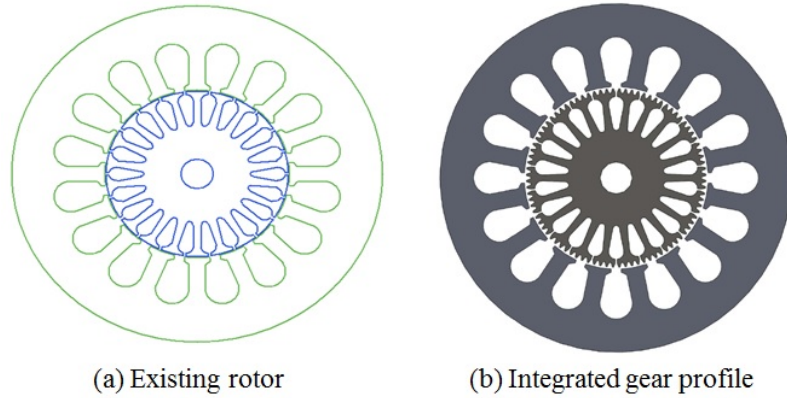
The cross-section of the gear profile integrated on the rotor
